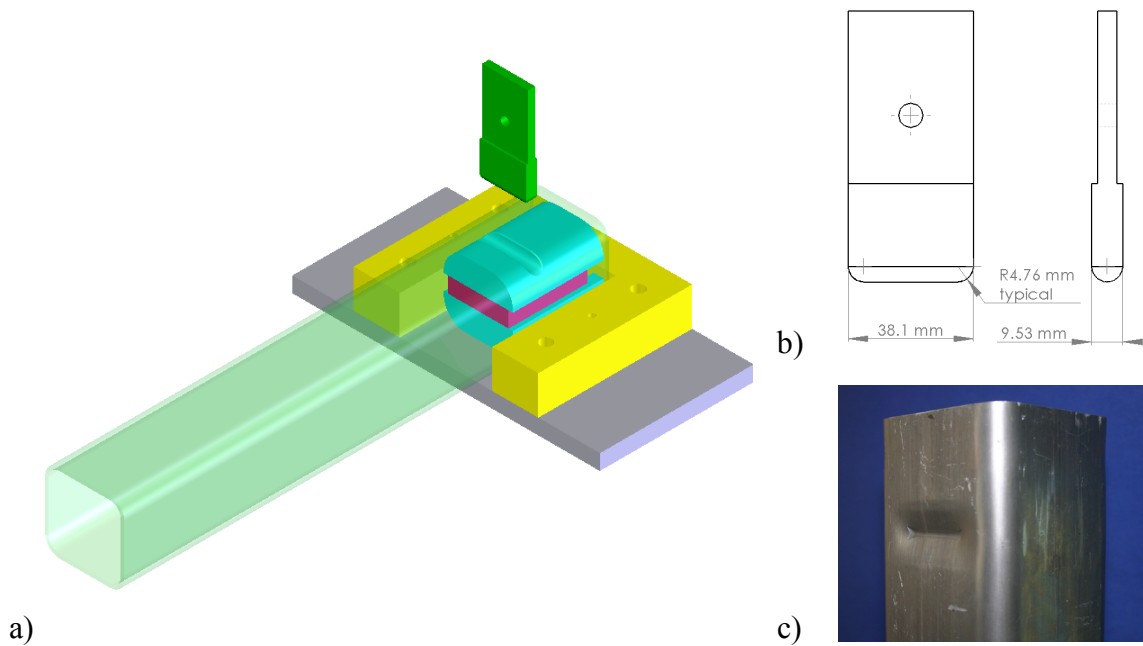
a) Model of components required to create fold initiators, b) tube indenter, and c) photo of the formed crush initiator
